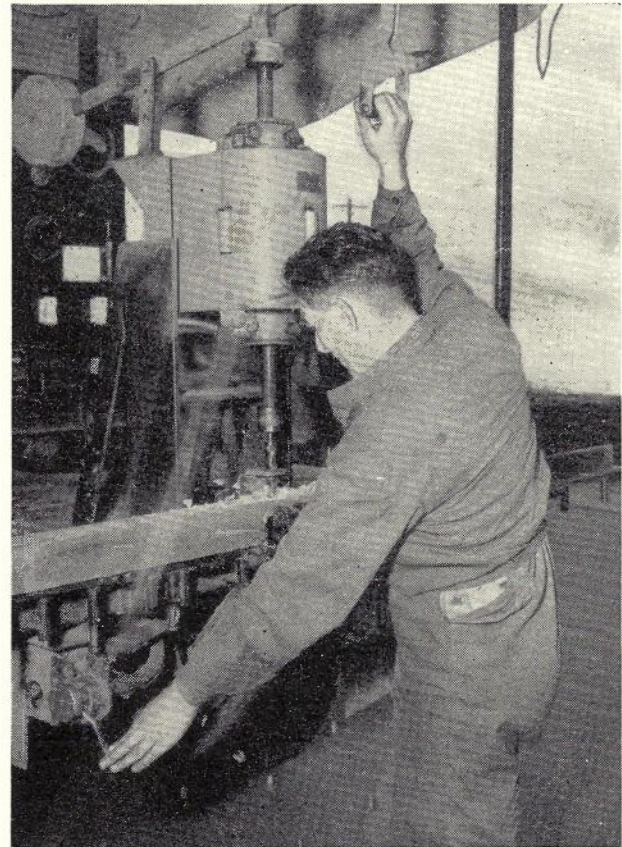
Vacuum operated piston (at left hand of operator) for clamping arms.
